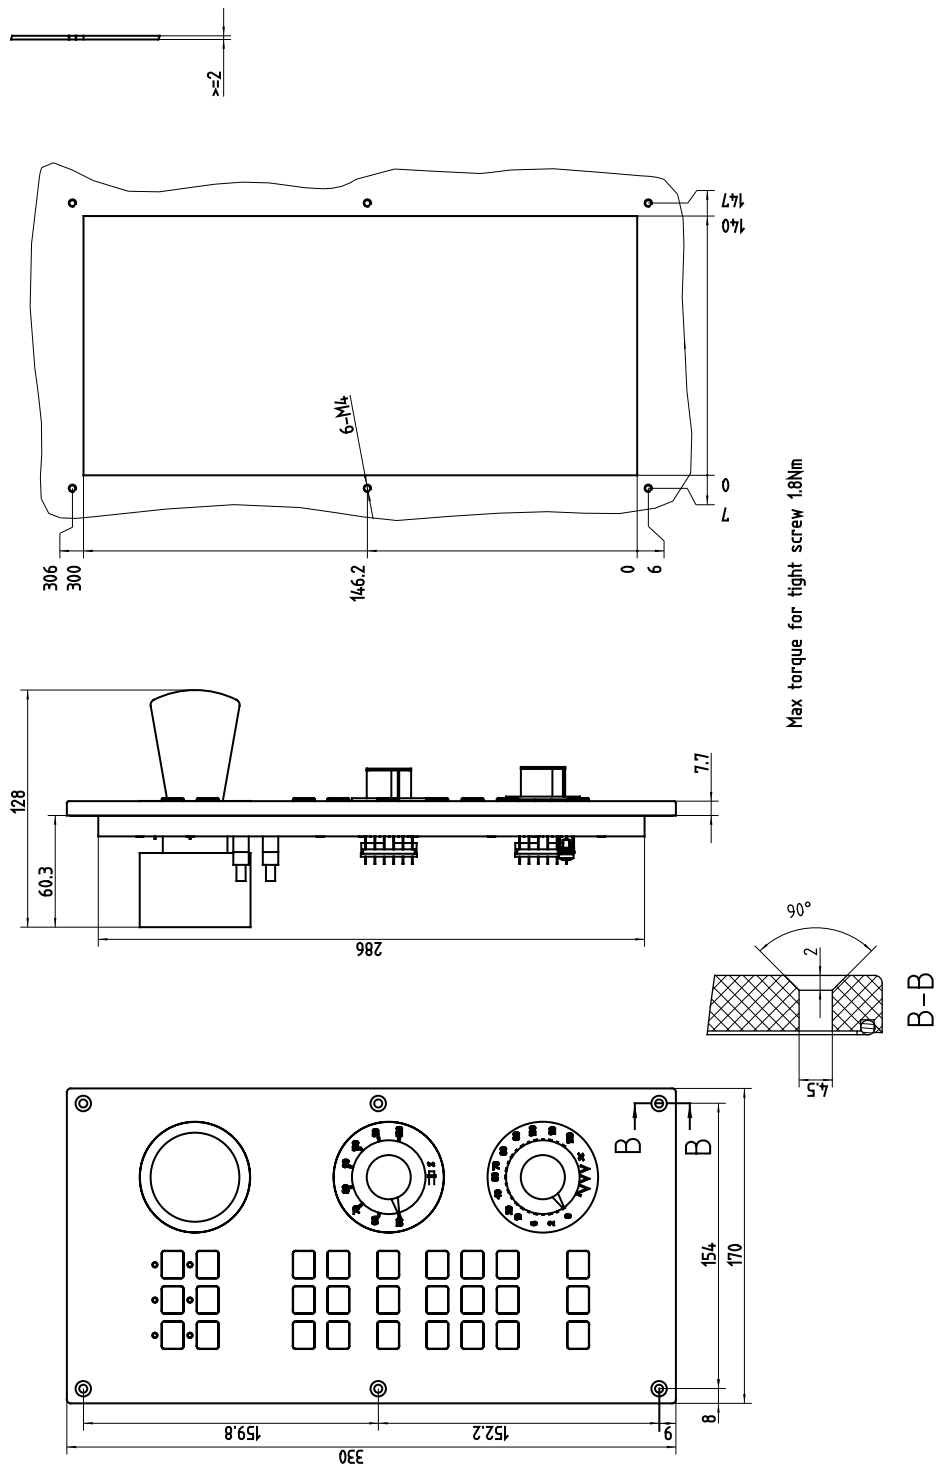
Dimension and hole drilling template of the machine control panel MCP 802D sl
